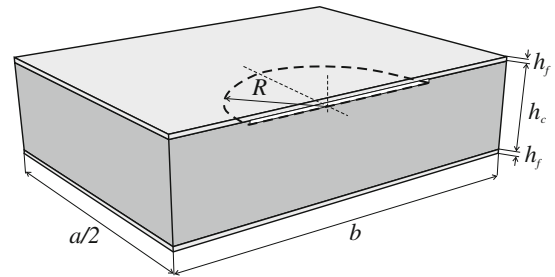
Half of sandwich plate with penny-shaped debonded zone
